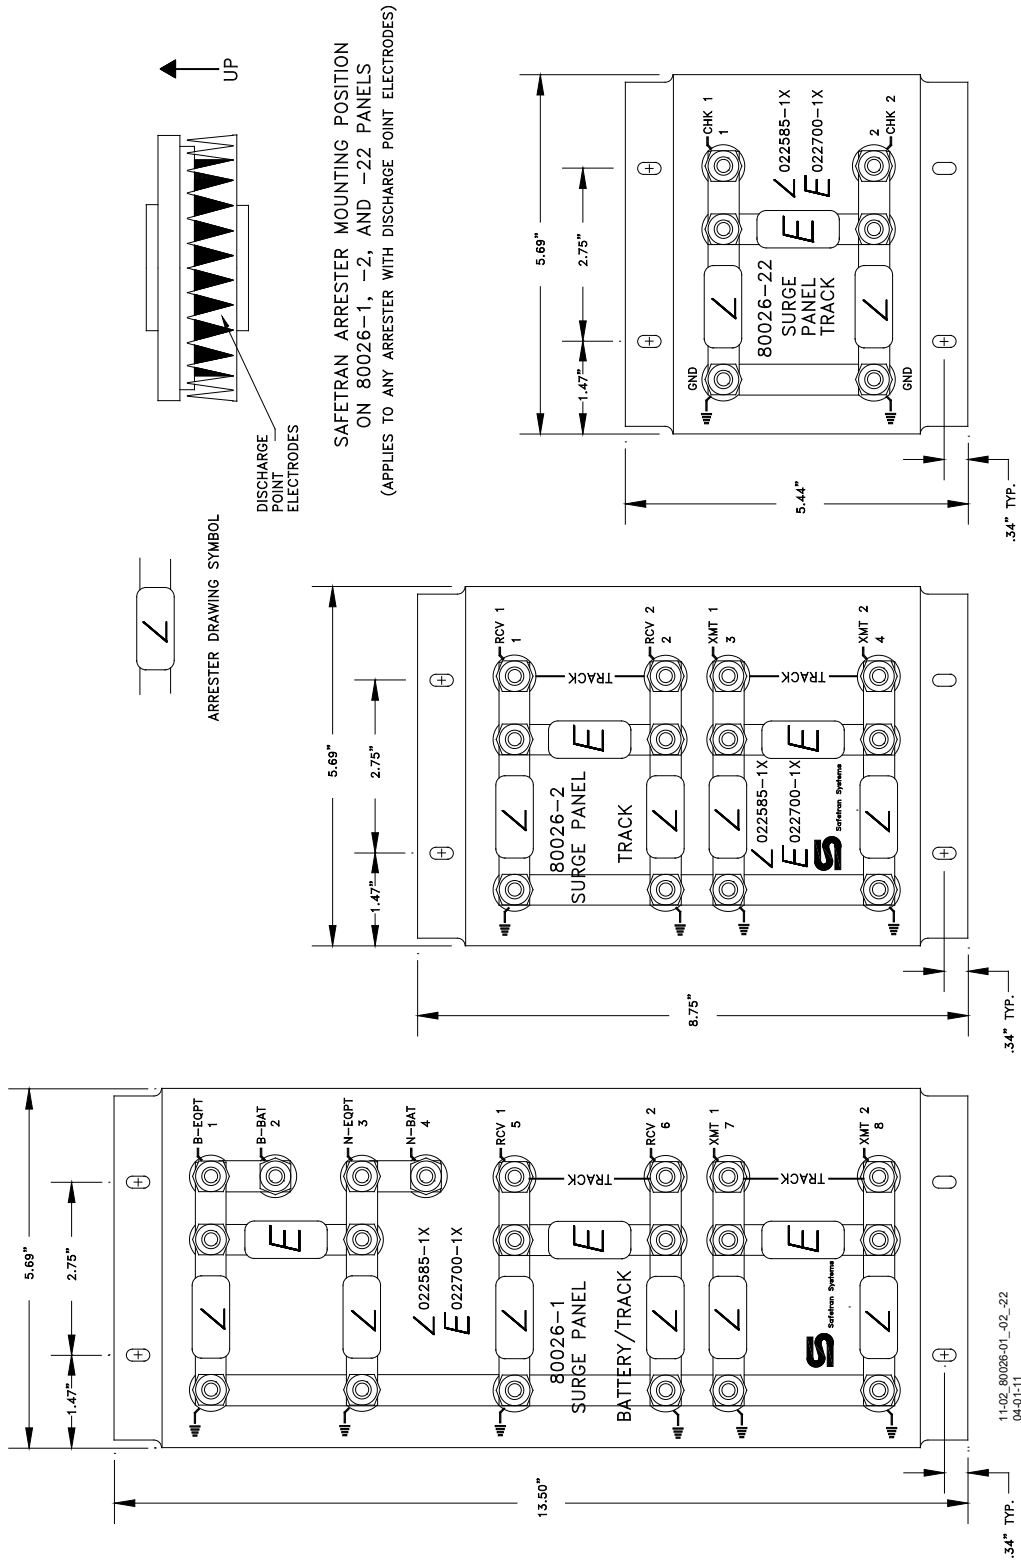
Wall Mount Surge panels, 80026-01 -02, and -22
